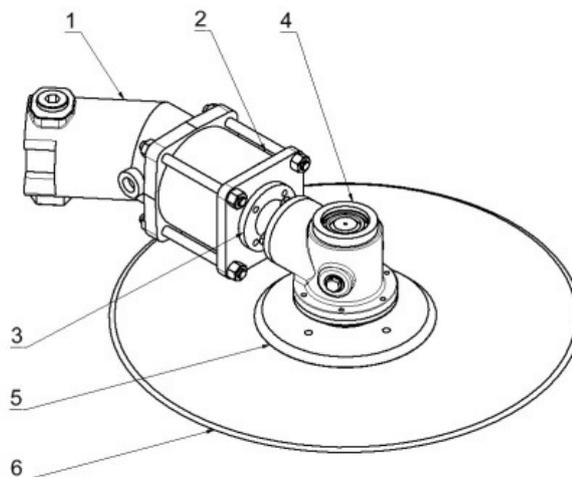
Rear transmission with hydromotor: 1 – axial piston hydromotor; 2 – clutch; 3 – extension; 4 – angular gear; 5 – carrier; 6 – cutting disc
